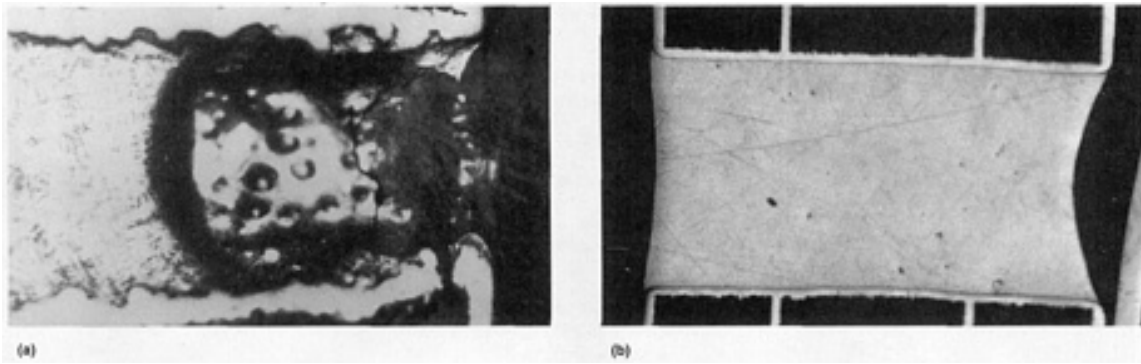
(a) Solder blow hole induced during solder shock testing. (b) Through-hole showing good solder fill after solder shock testing
